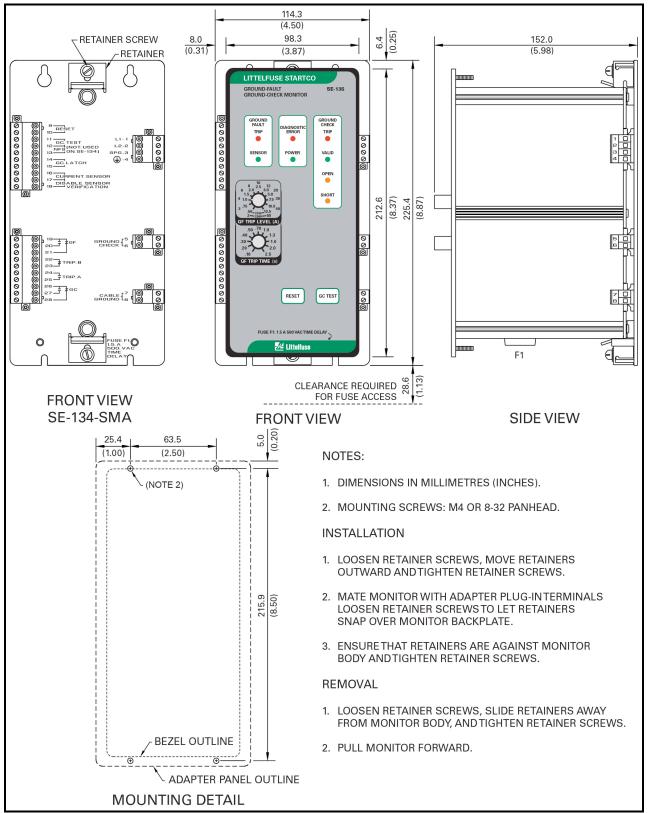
SE-134-SMA Surface Mount Adapter and SE-135 Surface-Mounting Details.
